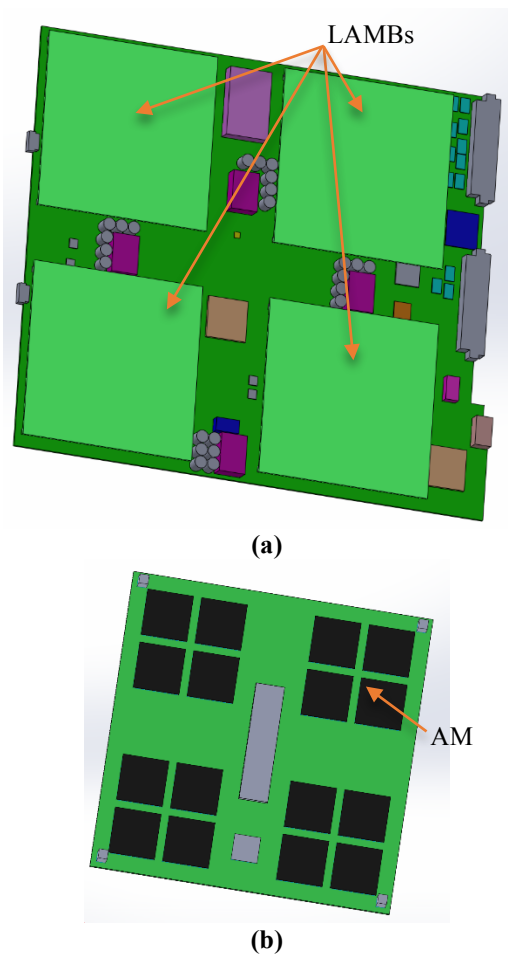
Layout of the board with AMs: (a) AMB; (b) AM side view of the LAMB.
